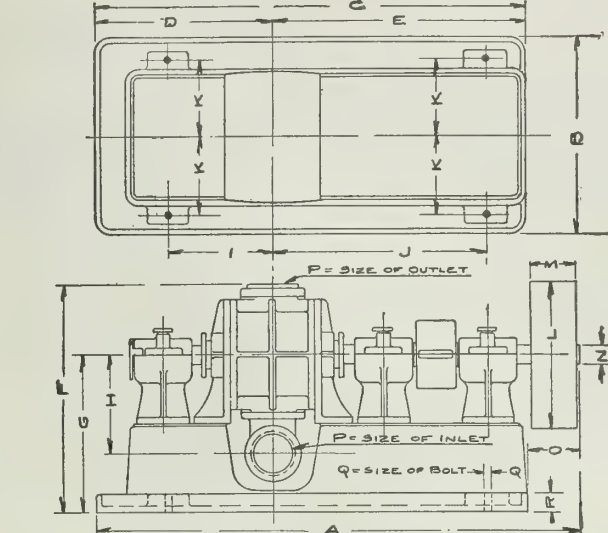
DIMENSIONS, BELT DRIVEN VACUUM PUMPS
